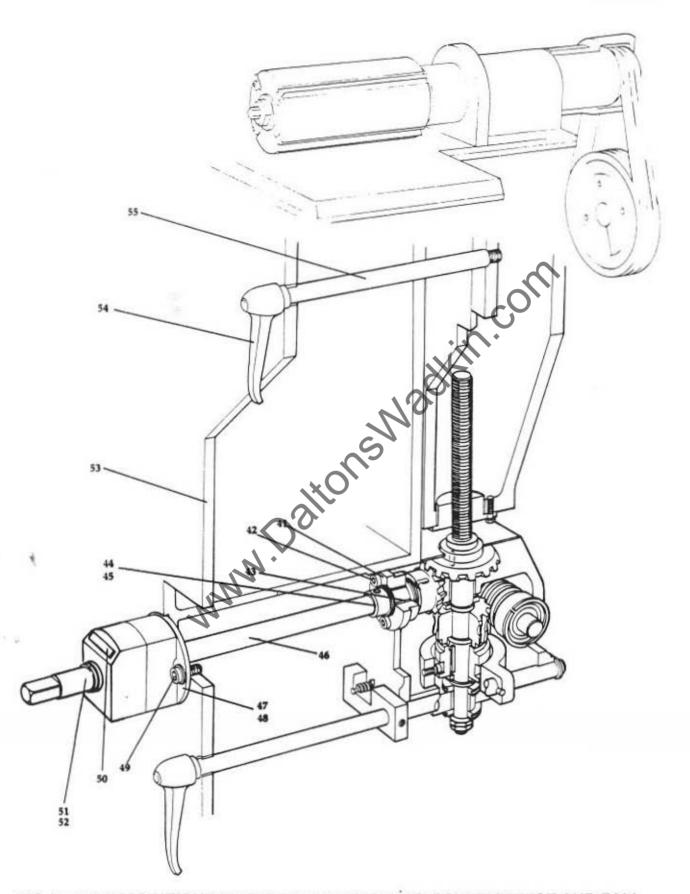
TOP HEAD HEIGHT ADJUSTMENT INCLUDING POWERED RISE AND FALL
